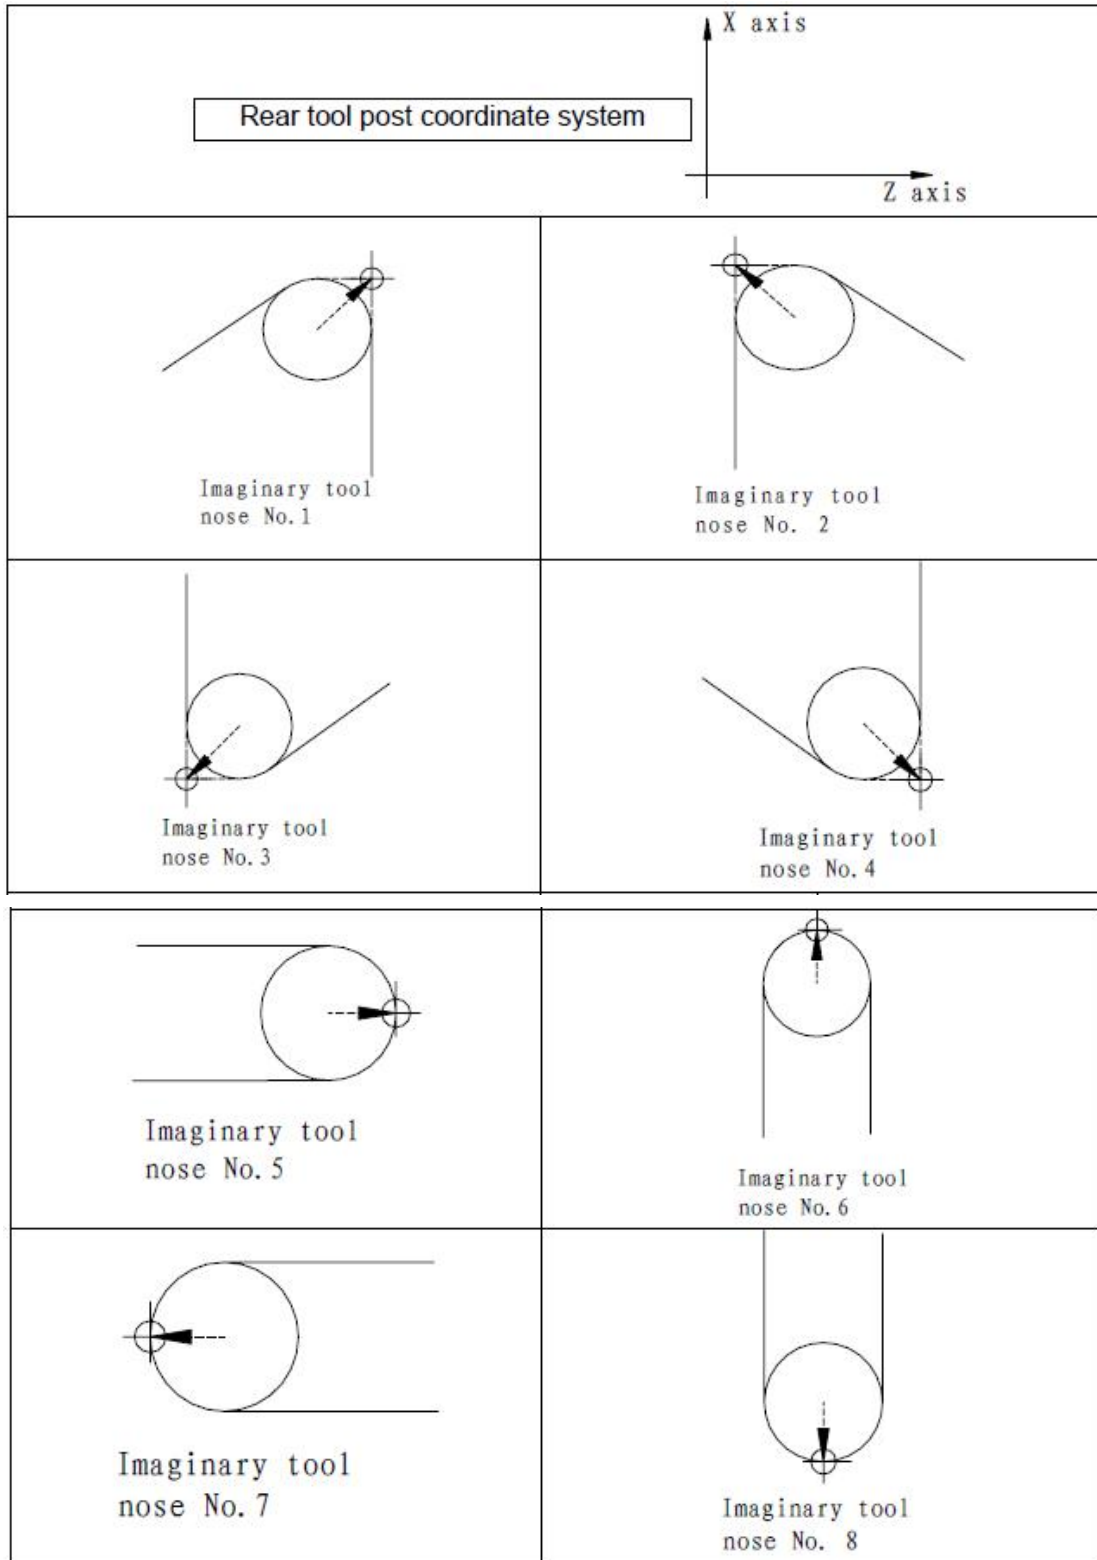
Imaginary tool nose number in rear tool post coordinate system
